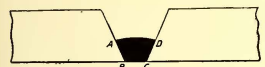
METHOD OF WELDING TWO PLATES TOGETHER
